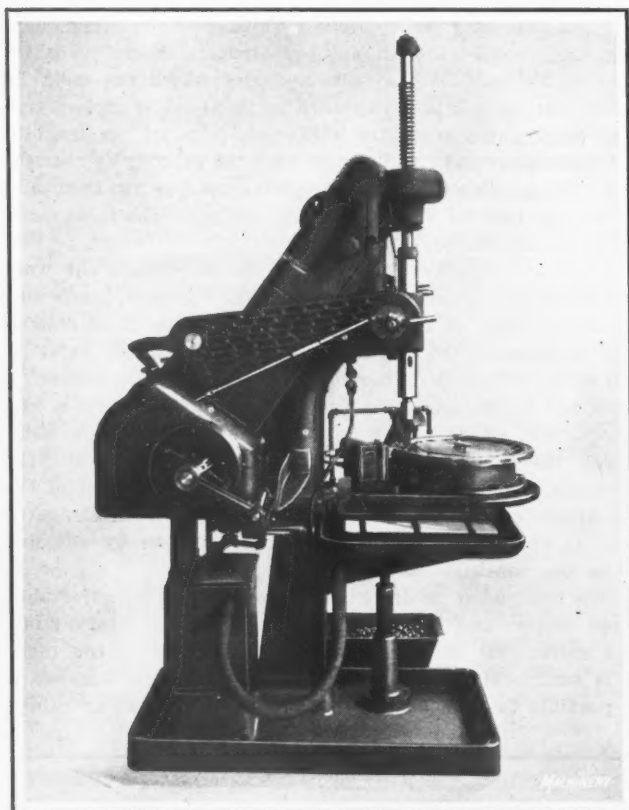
Automatic Self-oiling All-g geared Drilling and Tapping Machine built by the Barnes Drill Co.
